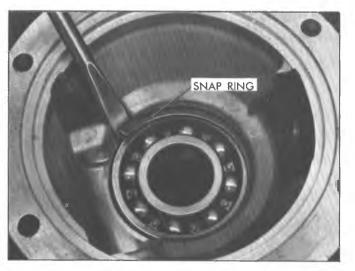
F—Removing Rear Output Bearing Retaining Ring
